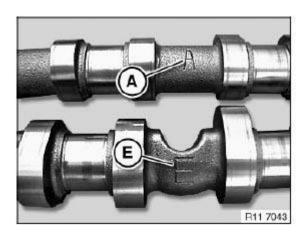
Identifying Camshafts Identifications Mark Courtesy of BMW OF NORTH AMERICA, INC.
